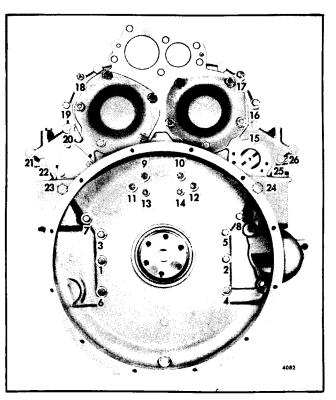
Flywheel Housing Bolt Tightening Sequence (Operation 2)--6V Engine
